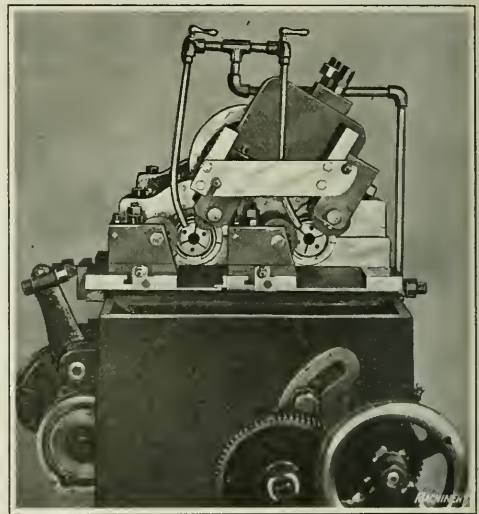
Close-up View of Automatic Forming Machine showing Arrangement of the Two Work-spindles
